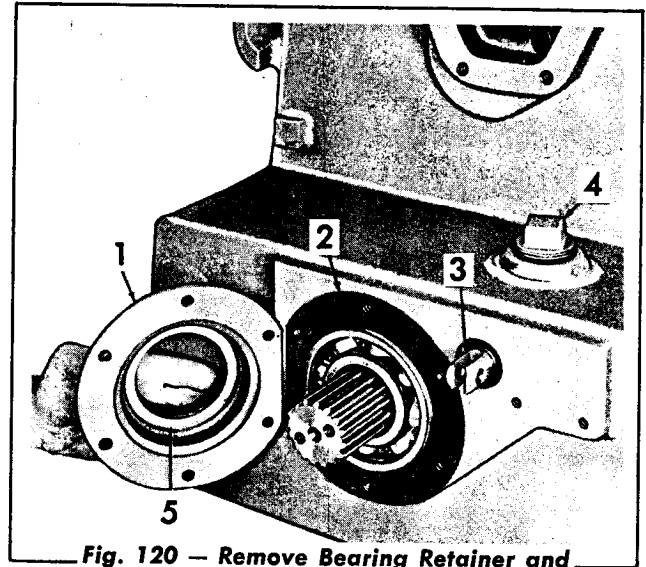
Remove Bearing Retainer and Shifter Shaft
